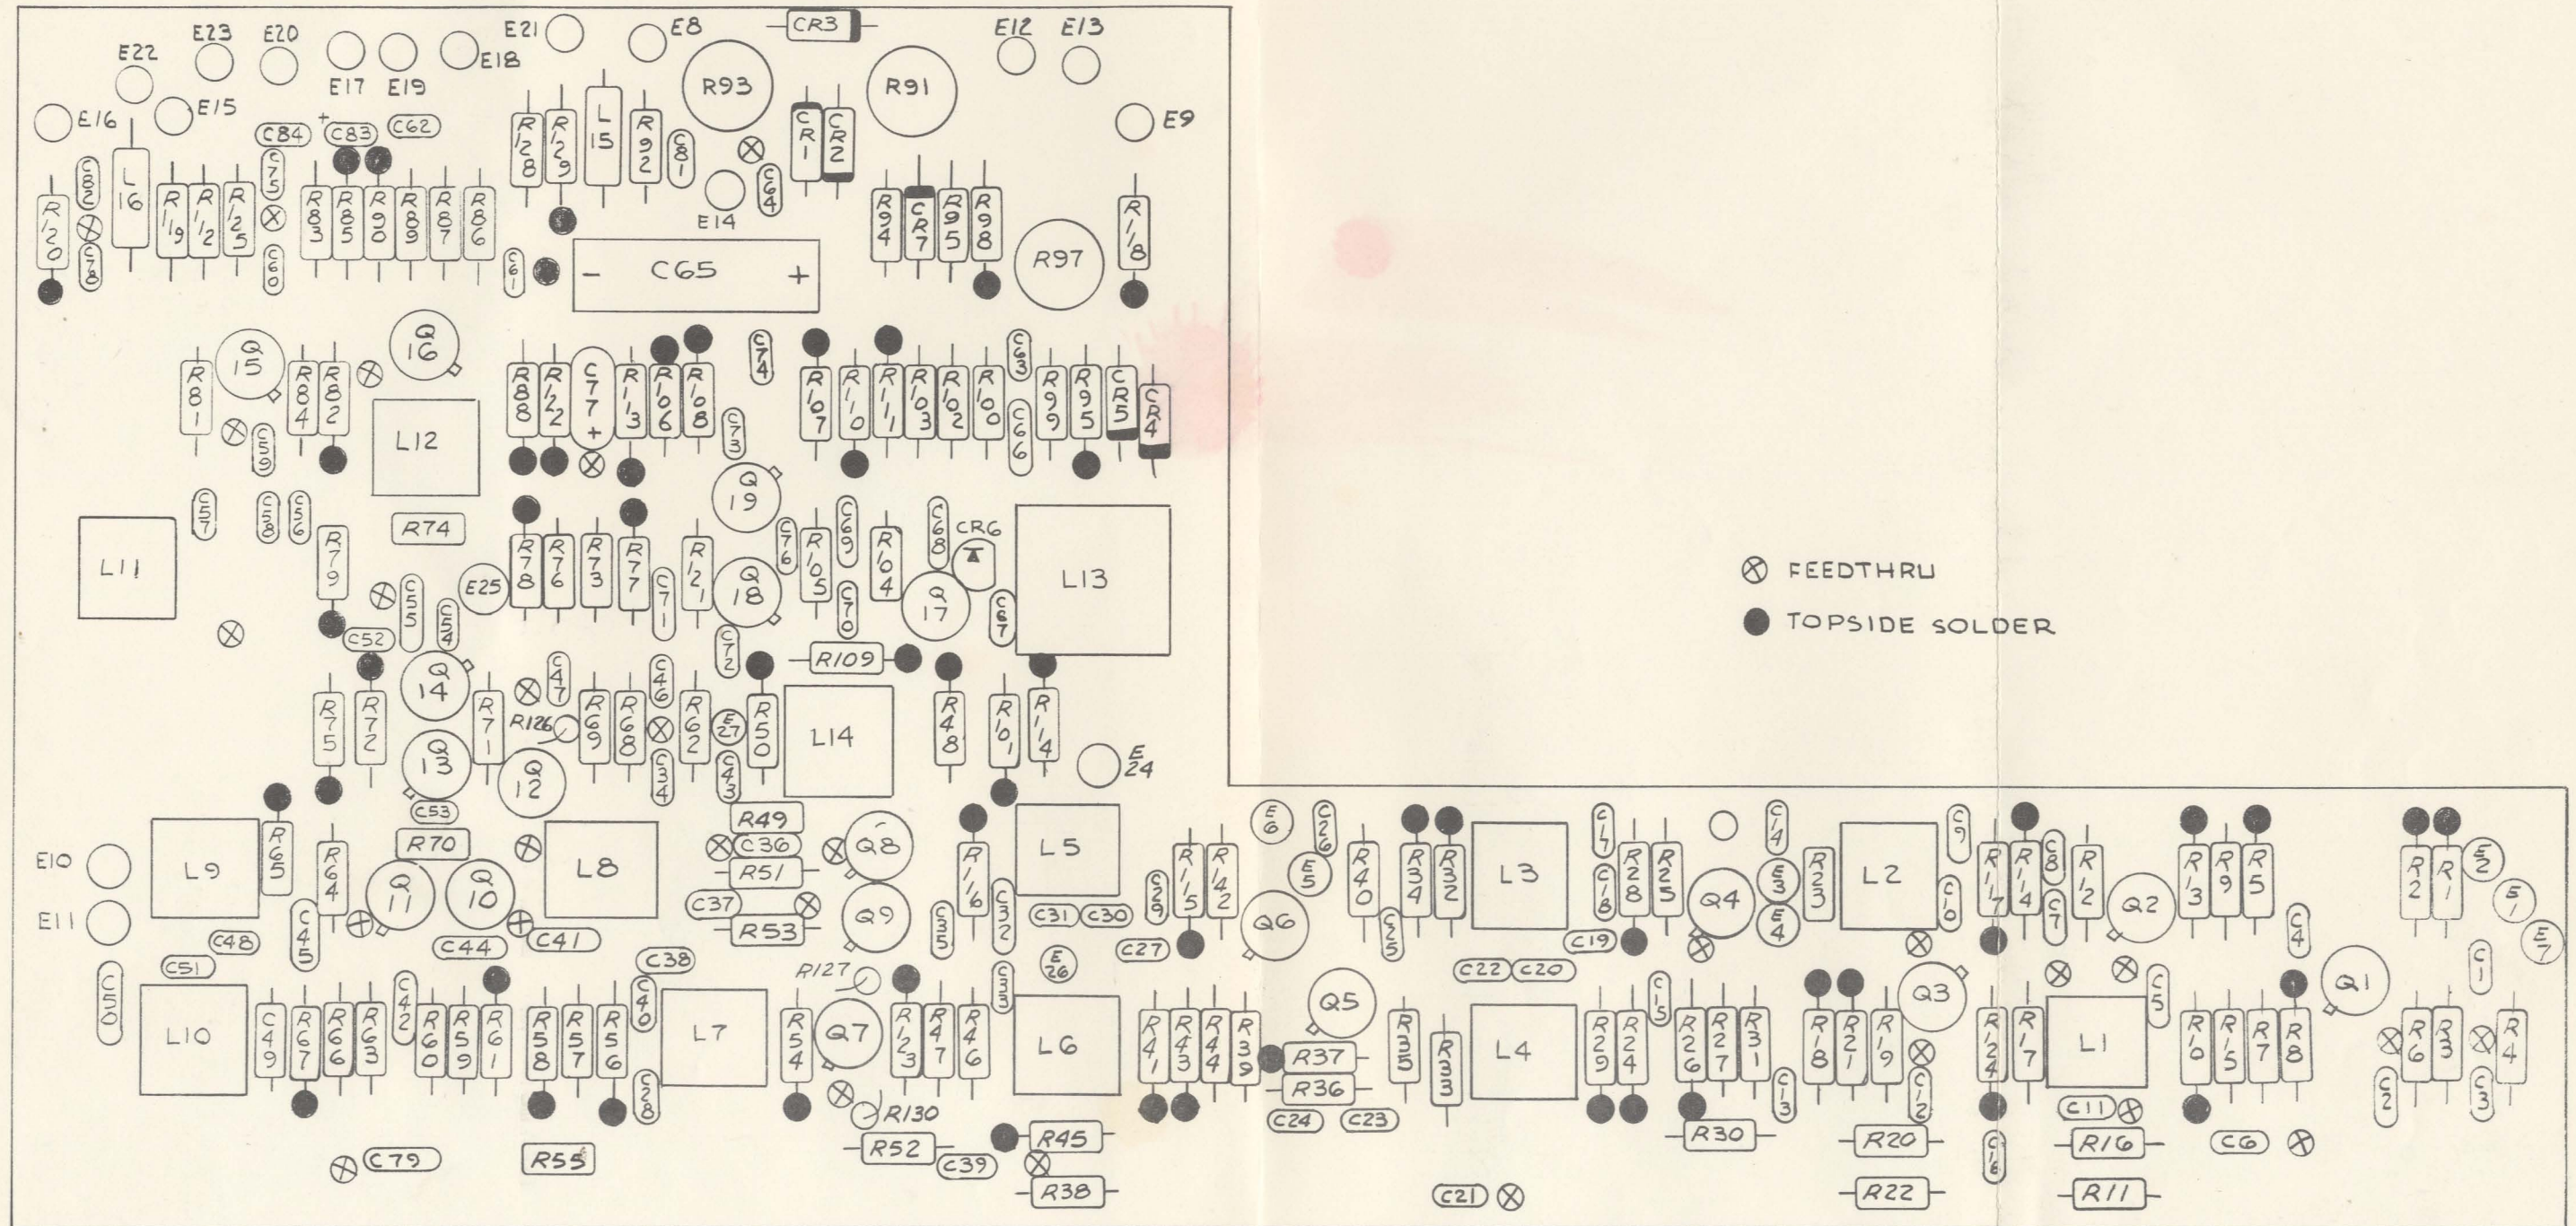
A1A1, RF Amplifier PC Board, Component Location
